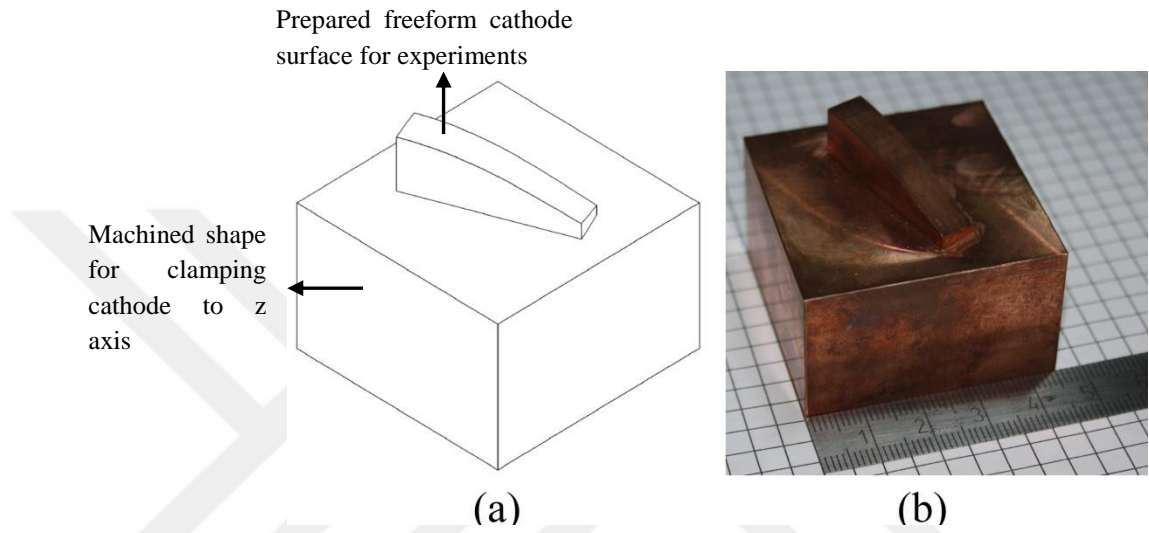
Drawing (a) and photographic view (b) of the cathode
